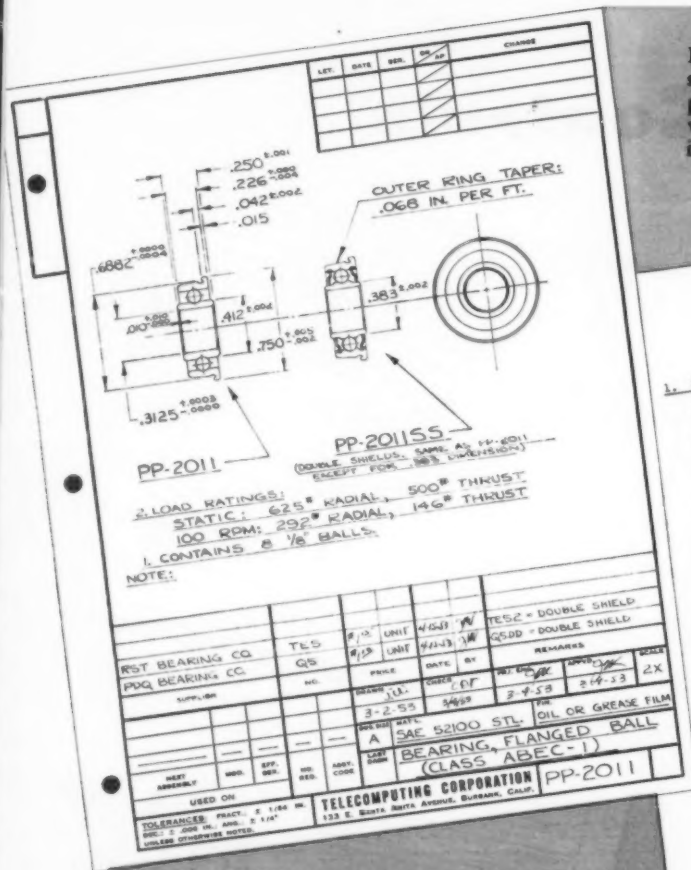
A drawing from the standard purchased parts book. Two different manufacturers have been listed as acceptable sources for this part. Room has been provided for listing additional sources.
